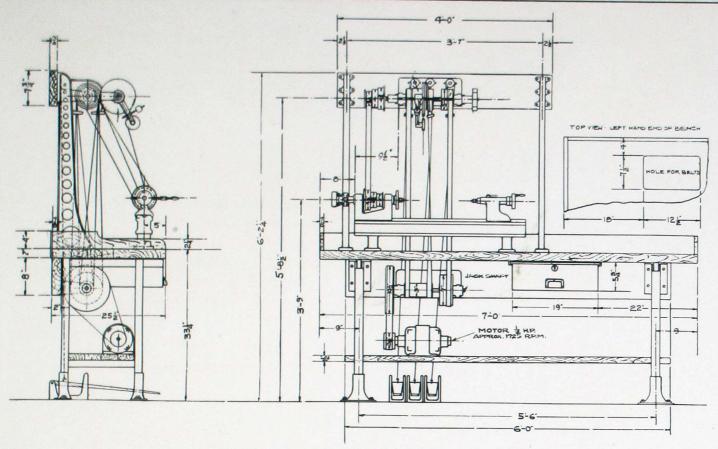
Lathe on Unit Bench, Individual Motor Drive.
